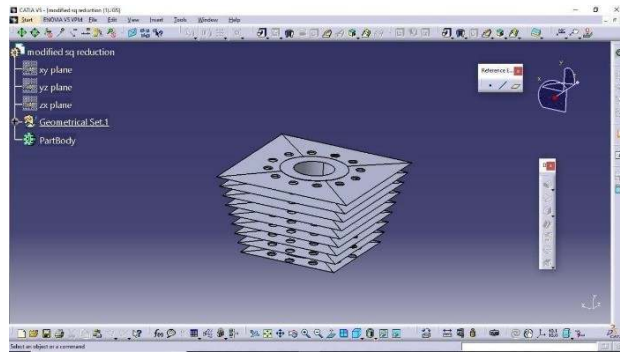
Design of Modified Sharp Edged Engine Fin
